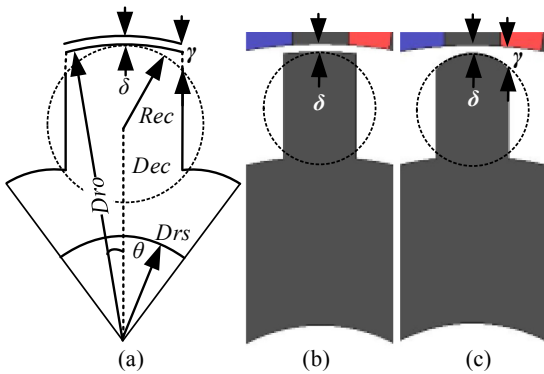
Schematics of eccentric Circular Shaping (a) Illustration (b) Rotor before Method I (c) Rotor after Method I
